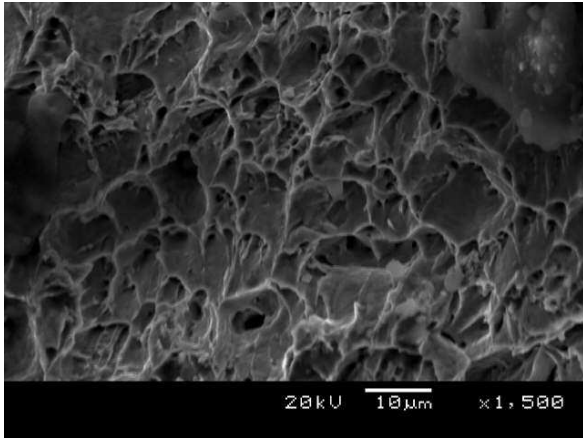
Fractograph, left hand strut fracture surface at point D (x1500, SEM)
